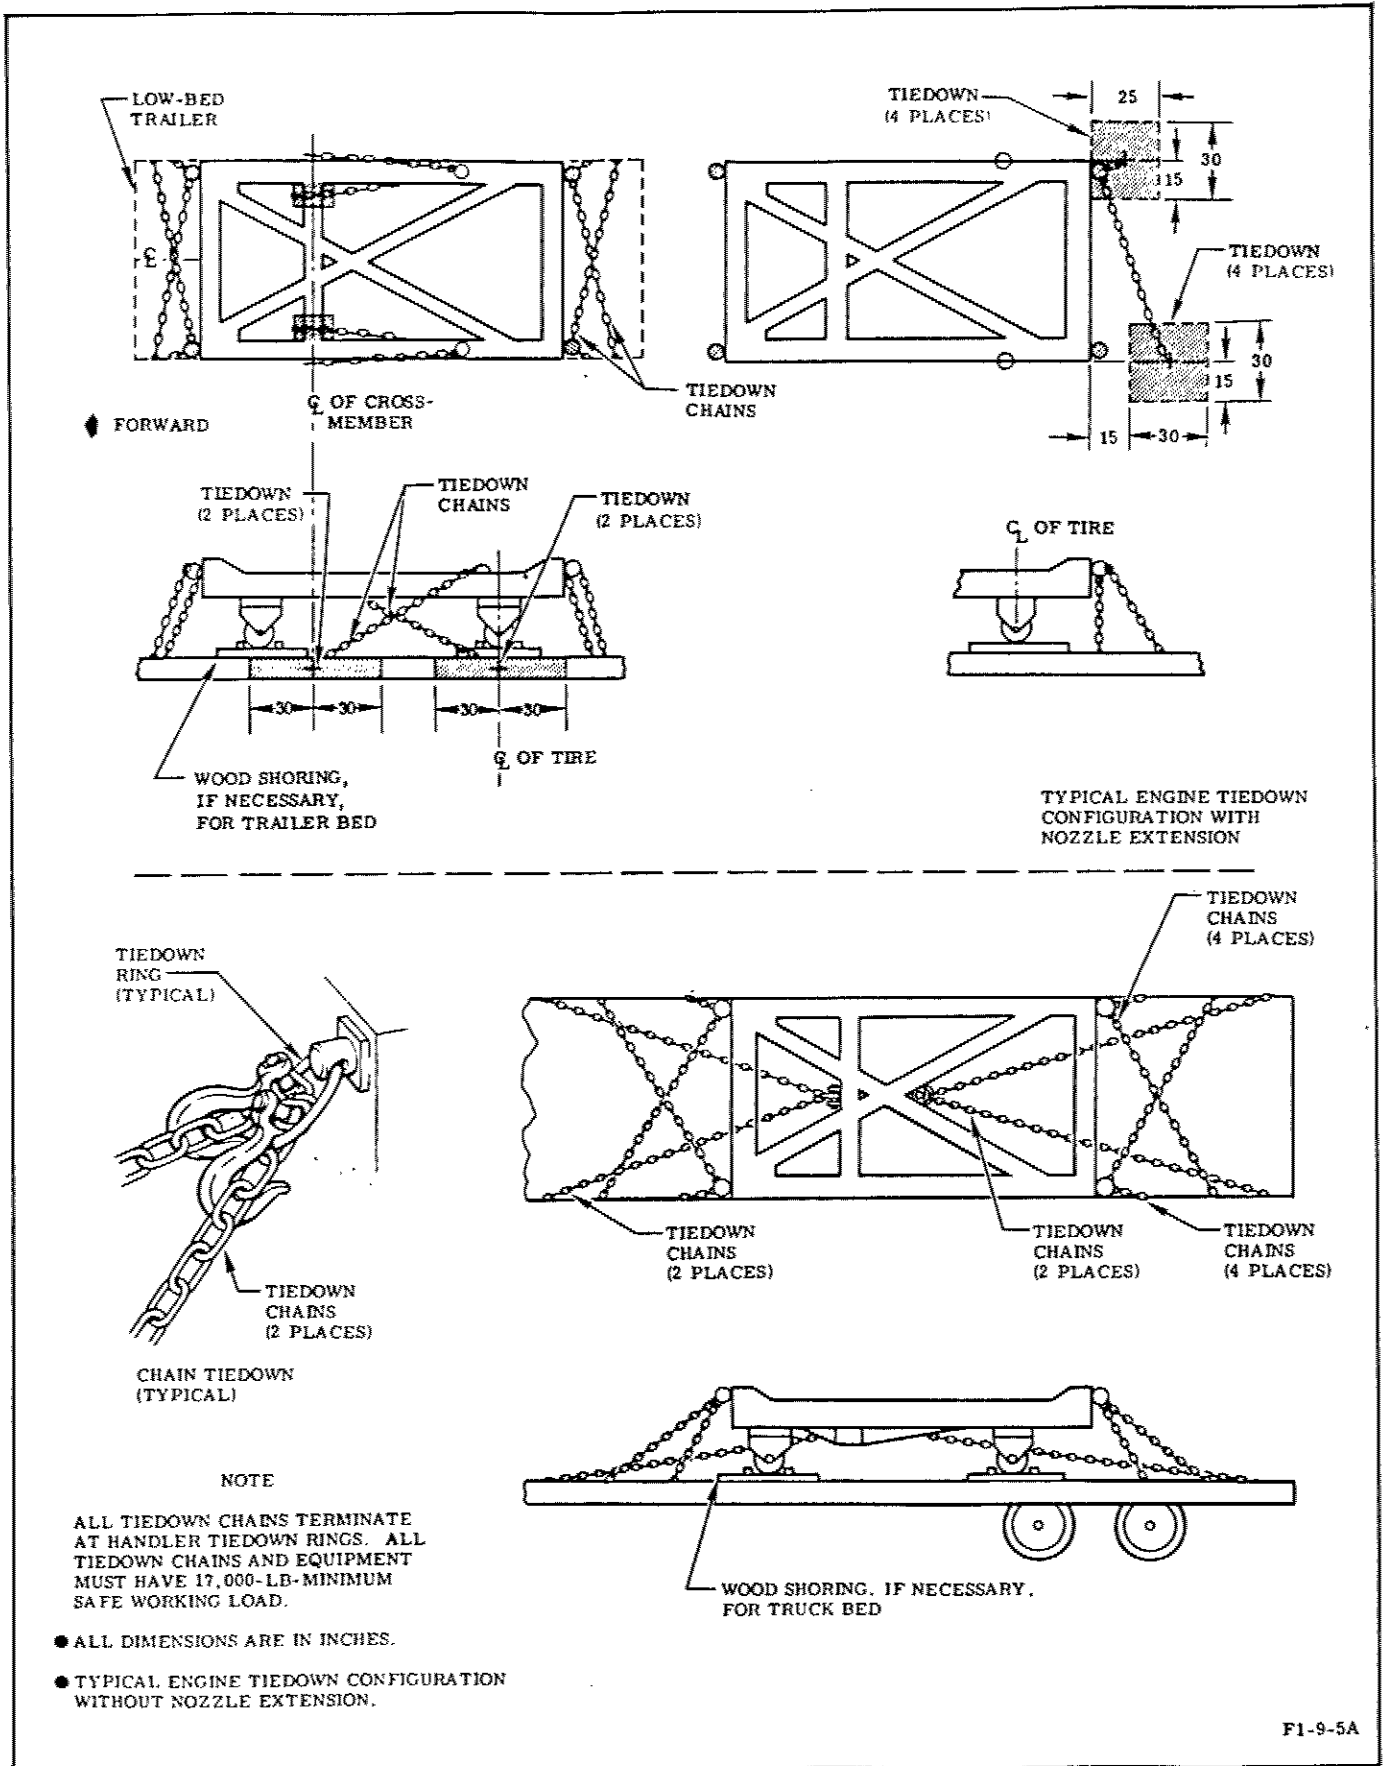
Loading Engine and Nozzle Extension on Low-Bed Trailer (Sheet 2 of 3)
